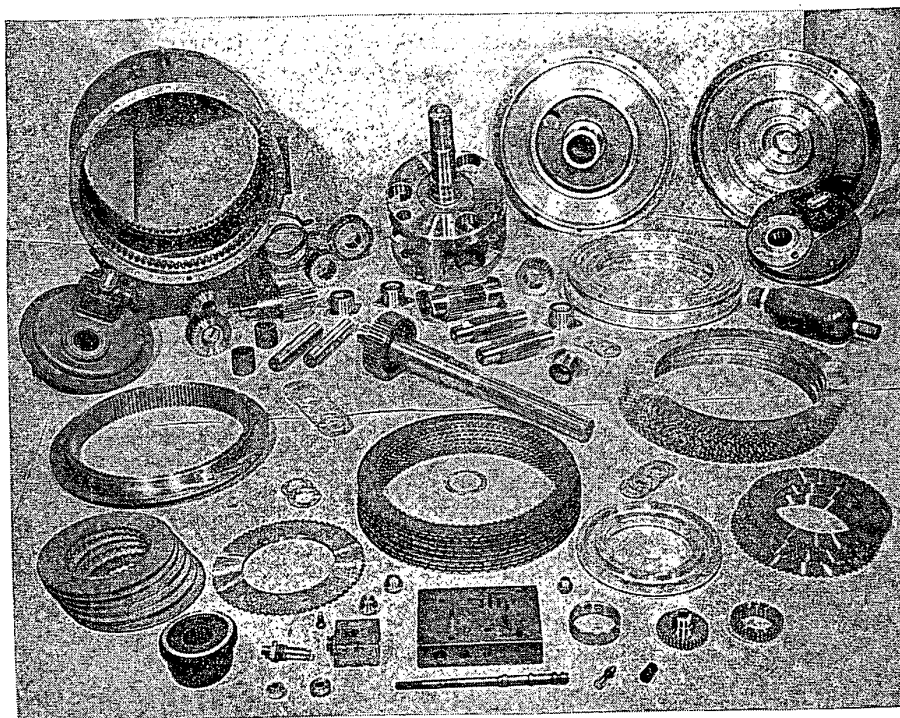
Disassembled parts for unit shown in Fig. 3-39. (Courtesy of Jered Industries, Inc.)
